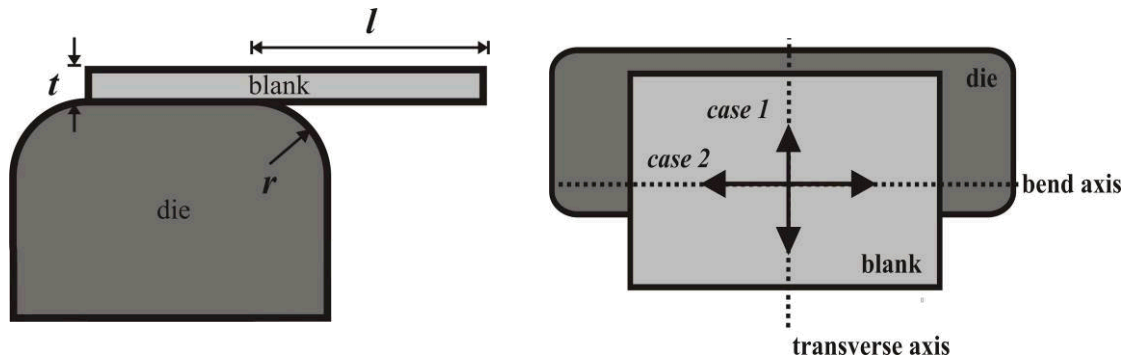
Experimental parameters: (a) blank thickness t , flange length l , die bend radius r , (b) rolling direction of the blank: along transverse axis(case 1) or along bend axis(case 2)
